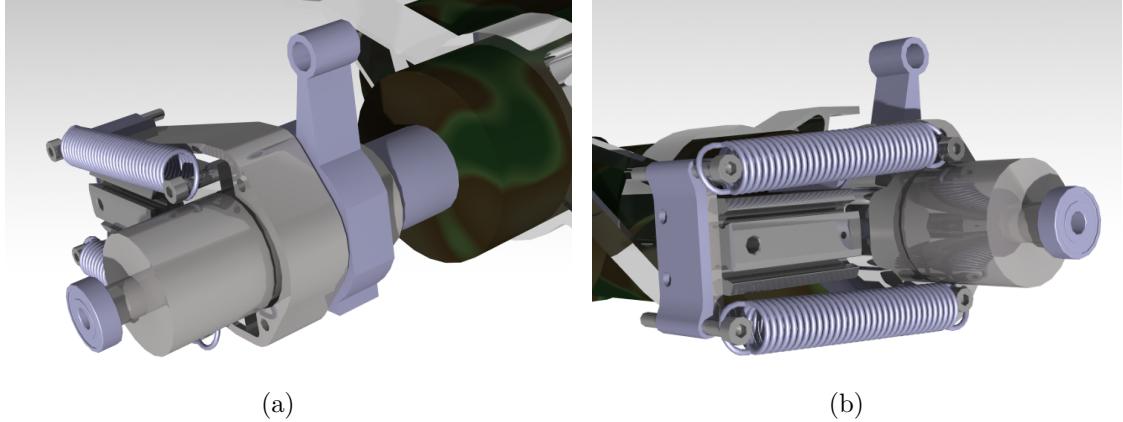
The pneumatic clamp that connects the actuator to the steering rack, allowing for autonomous steering.
